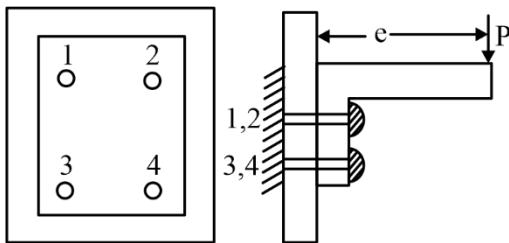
Eccentric load perpendicular to axis of the bolts
